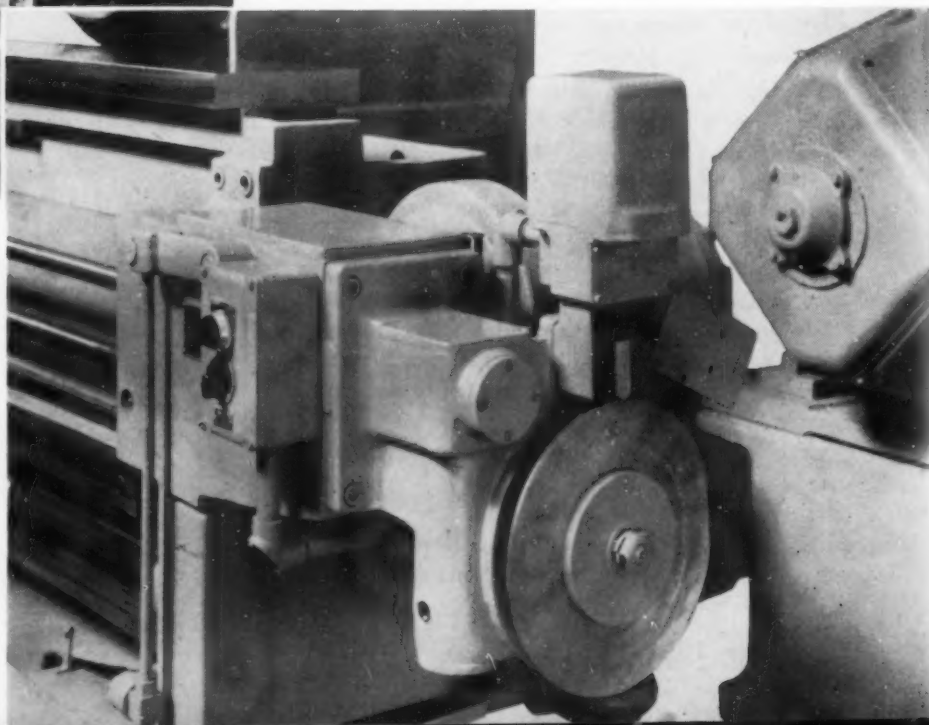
(above) Special turning equipment for large diameter workpieces. The setup for initial facing operation involves use of CO_2 coolant.
